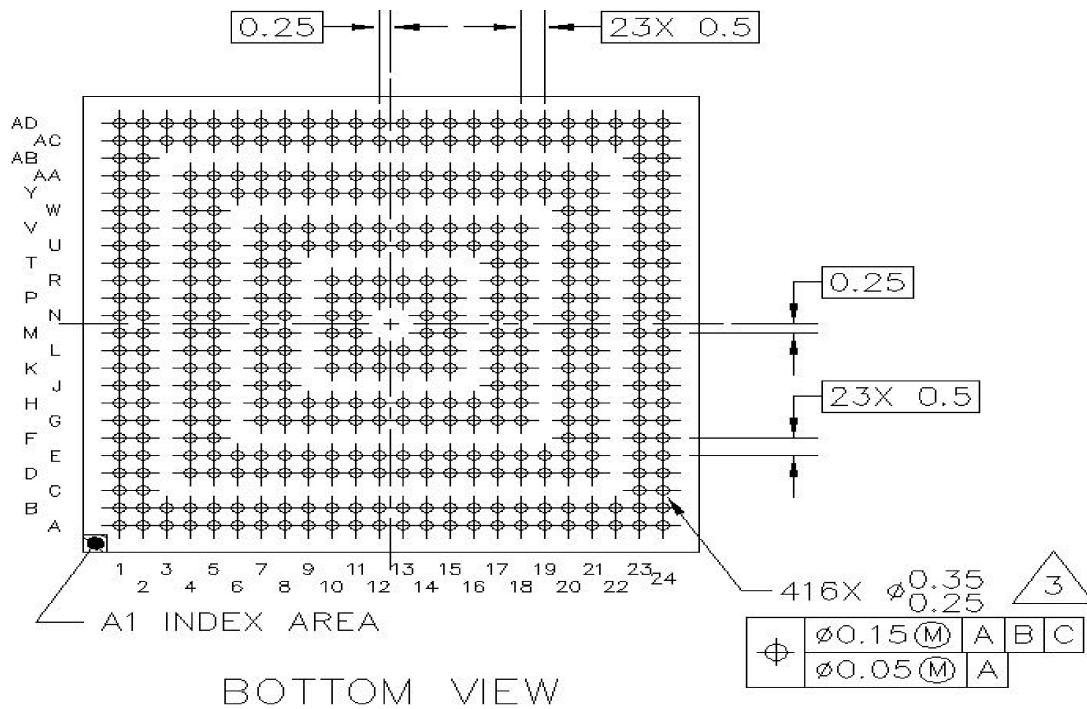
416 PoPBGA 13 x 13 mm Package Bottom View
